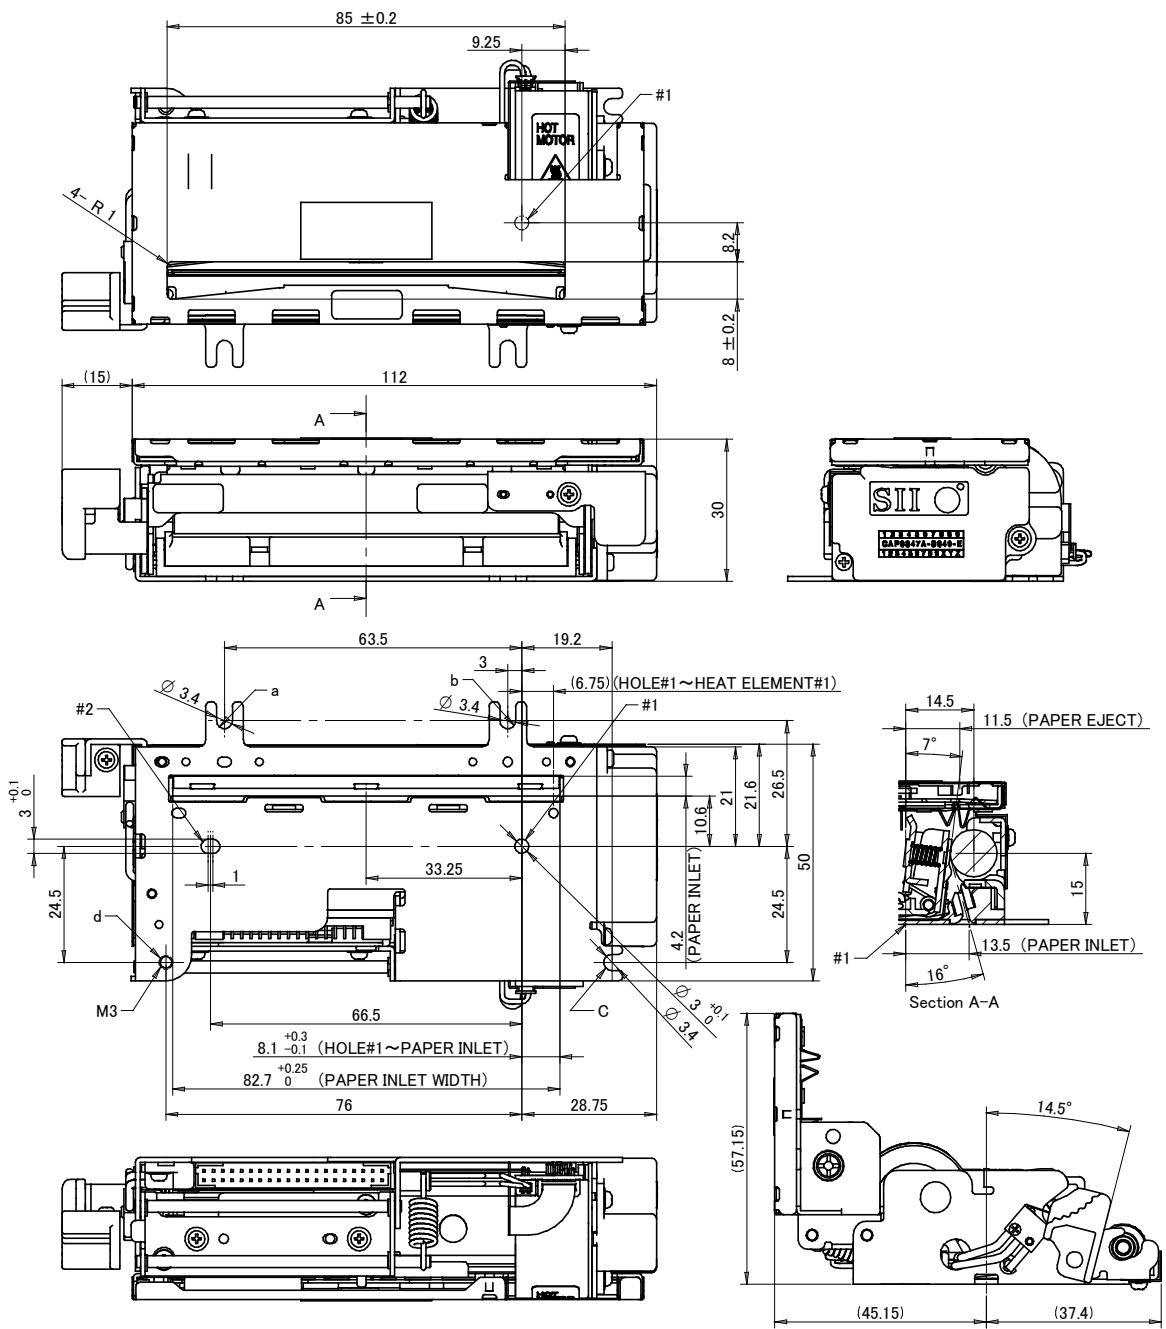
and Figure 7-6 show the external dimensions of the LTP9247 series printer unit.
